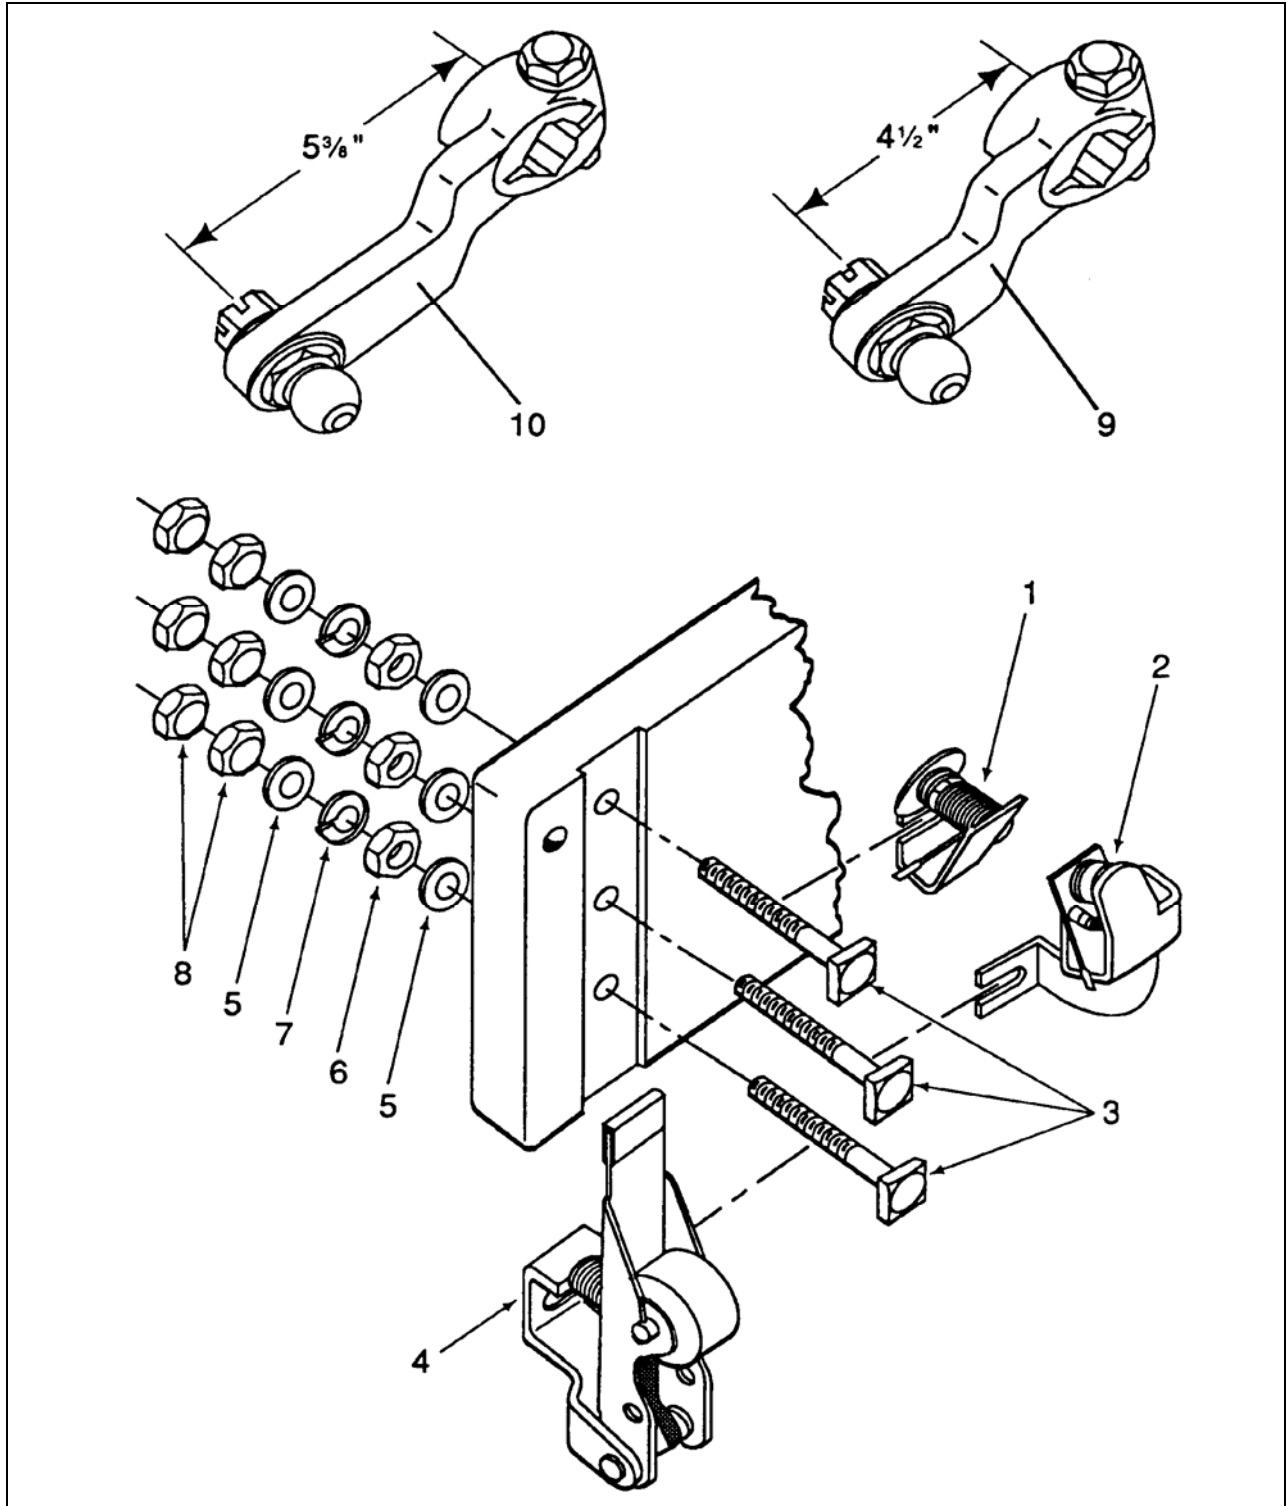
Model 7J Controller Contact Assembly and Crank Arms
